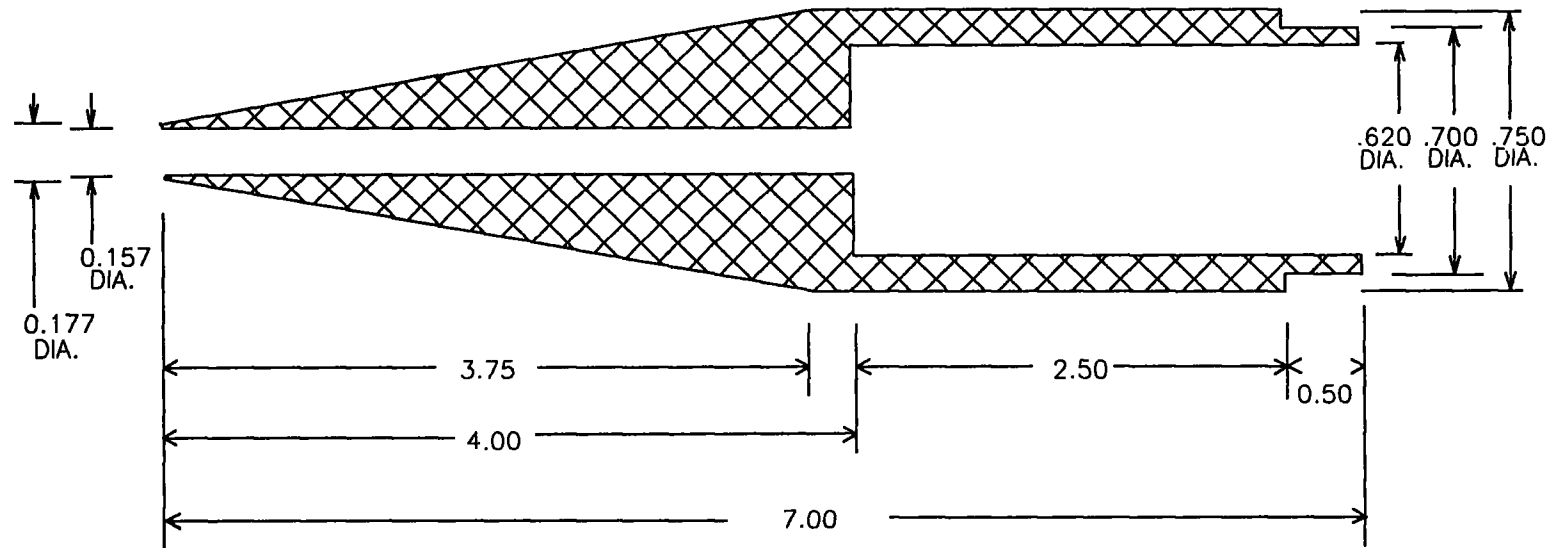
Detailed Drawing of McGregor 3 Probe.
